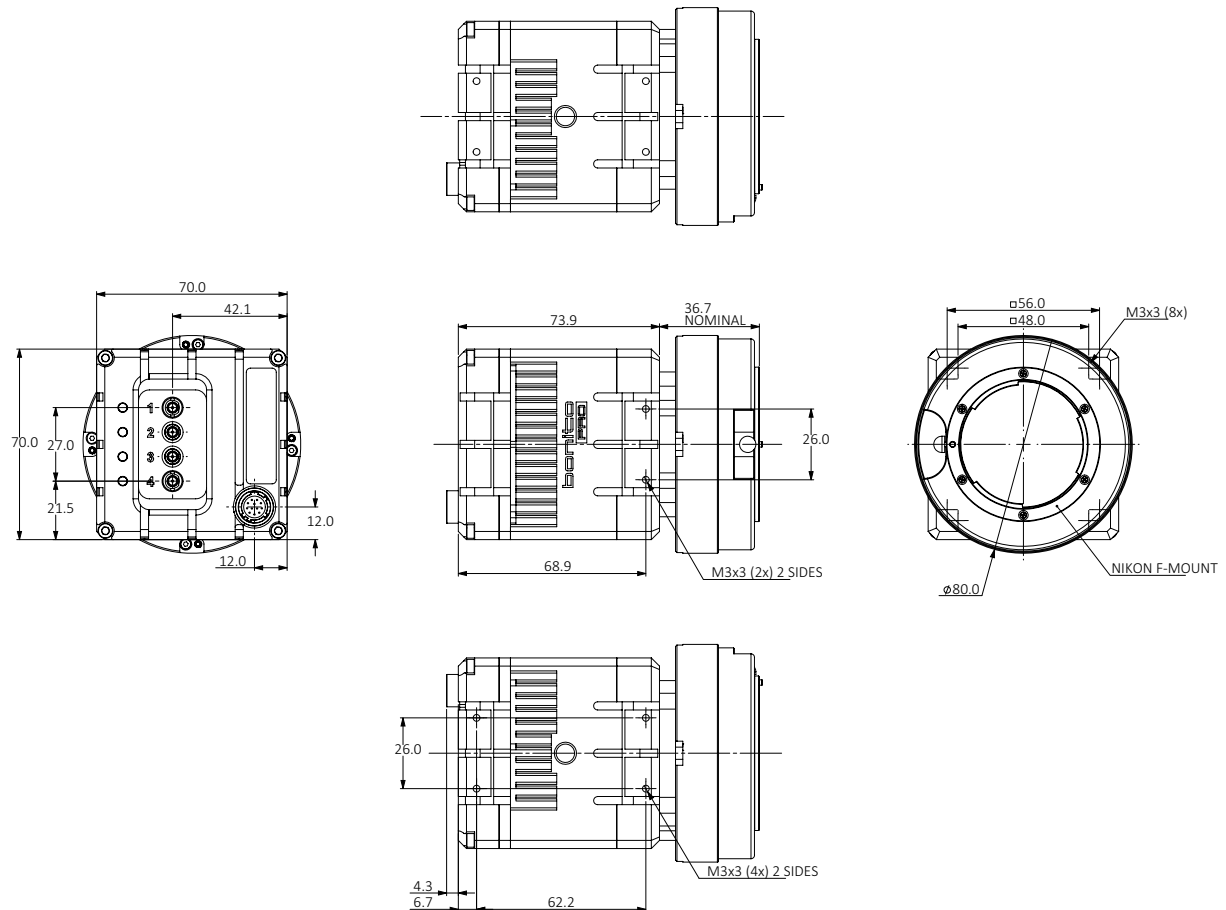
Bonito PRO camera with F-Mount PA mechanical dimensions
